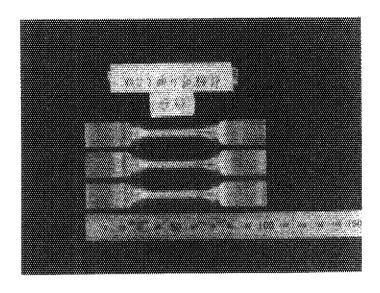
Appearance of specimen before torsion fatigue test(base material).
